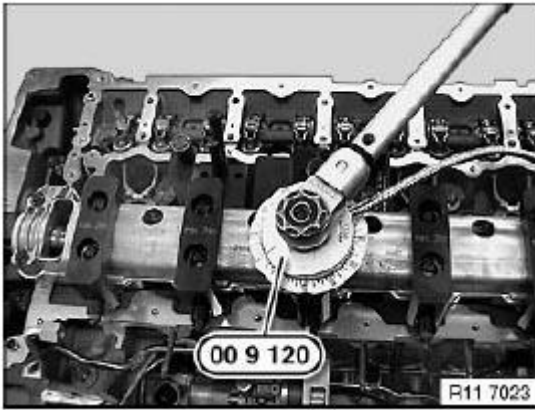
Tightening Lower And Upper Bearing Banks With Special Tool (00 9 120)
